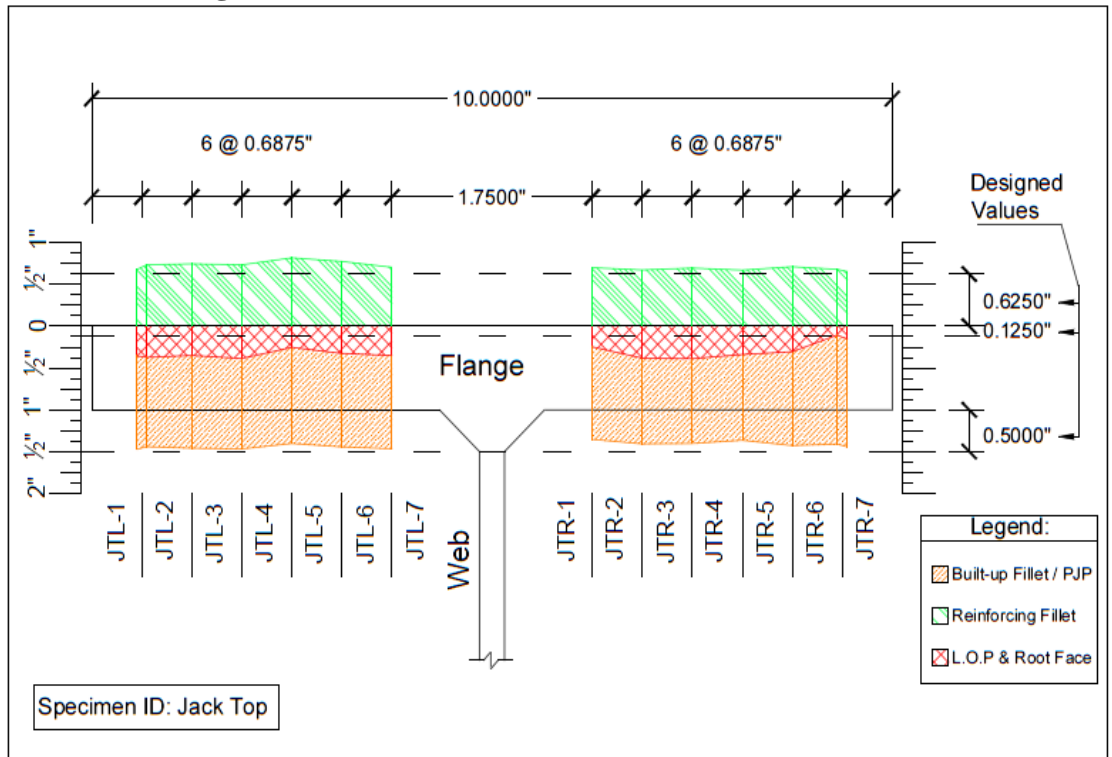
JT- Cross Sectional Weld Penetration View
